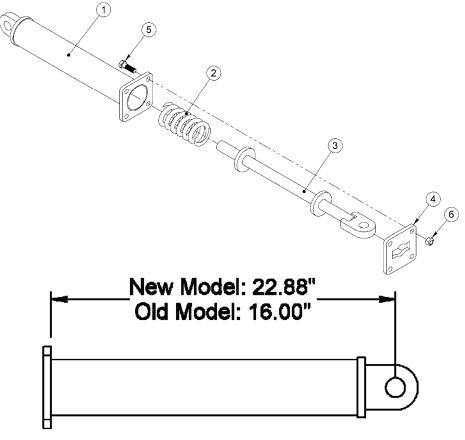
Spring-Cushion Lift Tube Assembly
